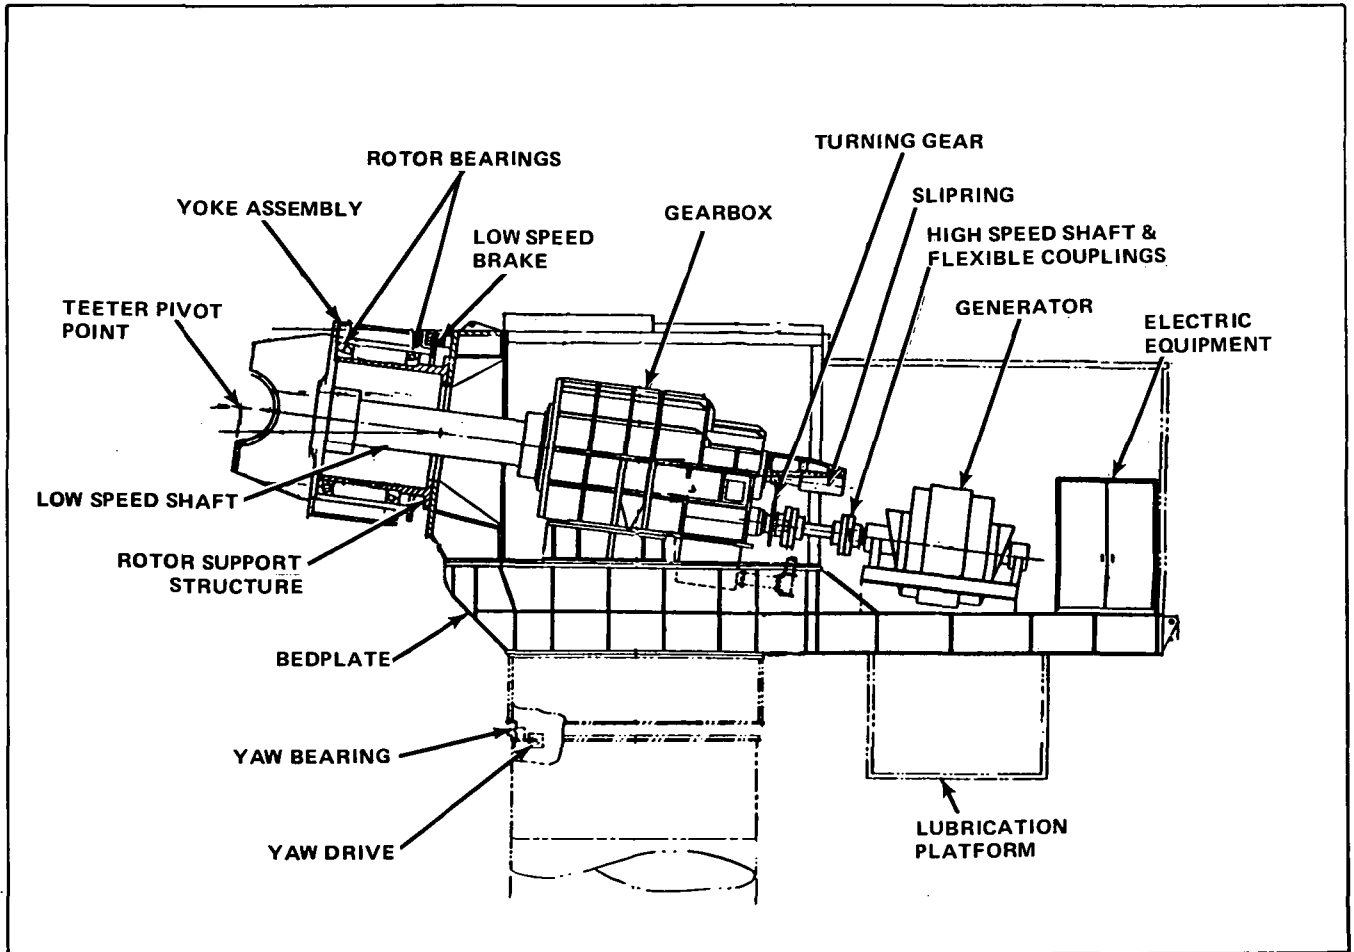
CUT-AWAY VIEW OF NACELLE SHOWING ROTOR SUPPORT AND DRIVETRAIN ELEMENTS
